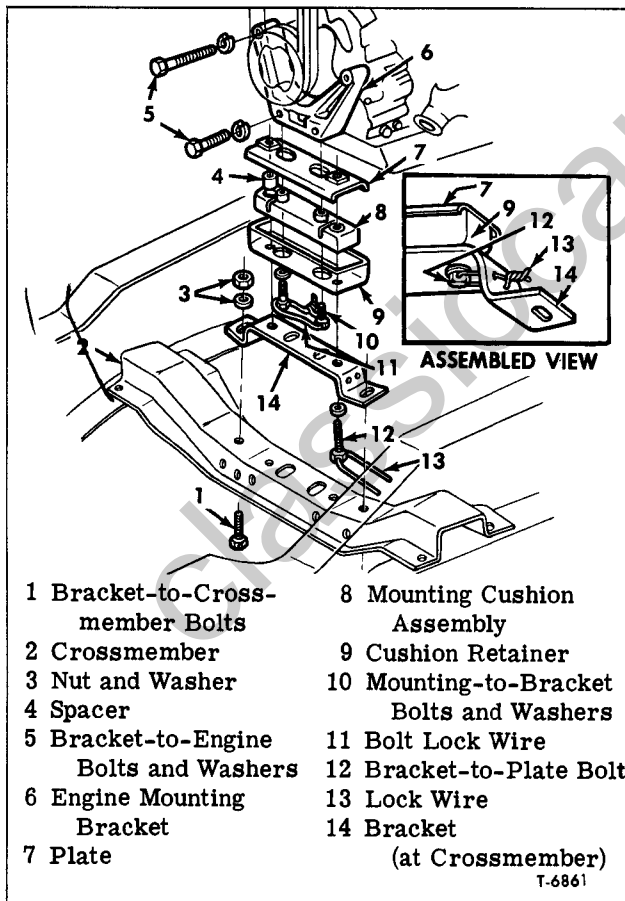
Engine Front Mounting on TV 70 Series (6V-53 Engine)
